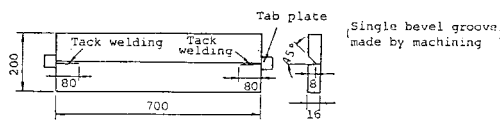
Configuration of Test Plate and Location of Tack Welding.
